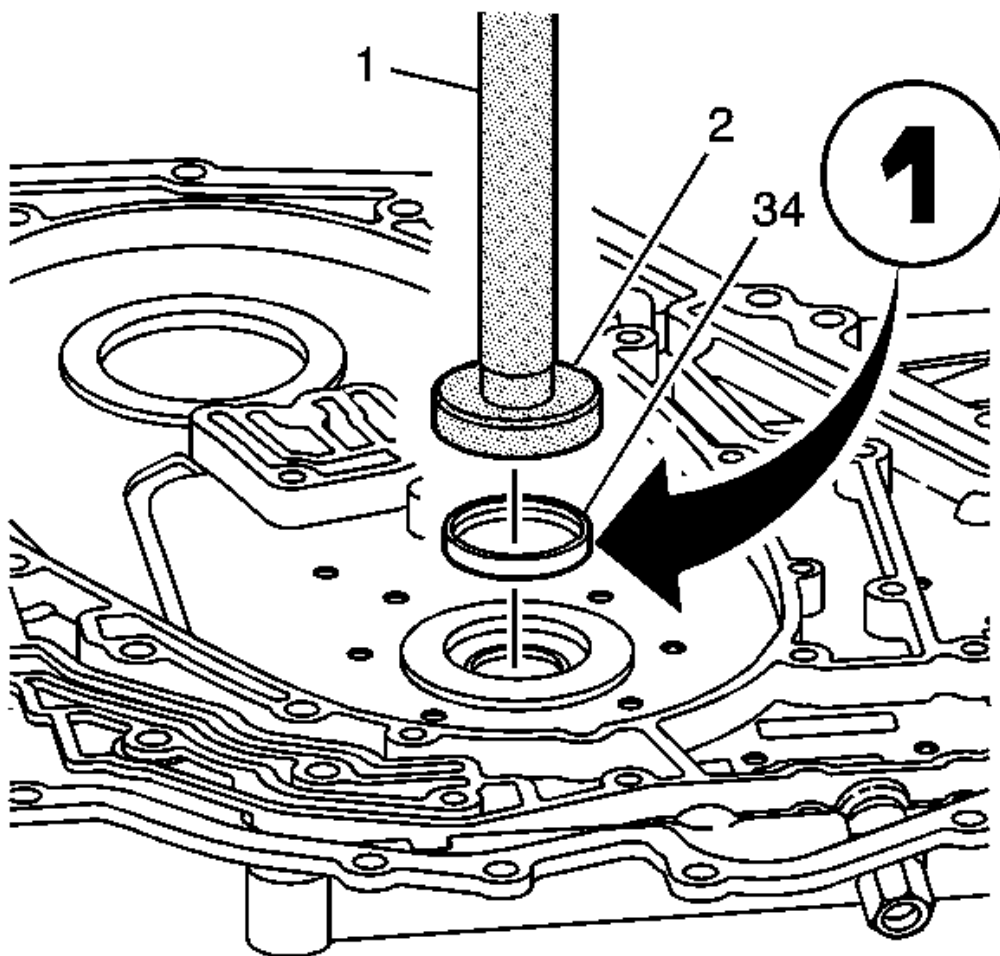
Drive Sprocket Seal, Driver Handle & Seal Installer
